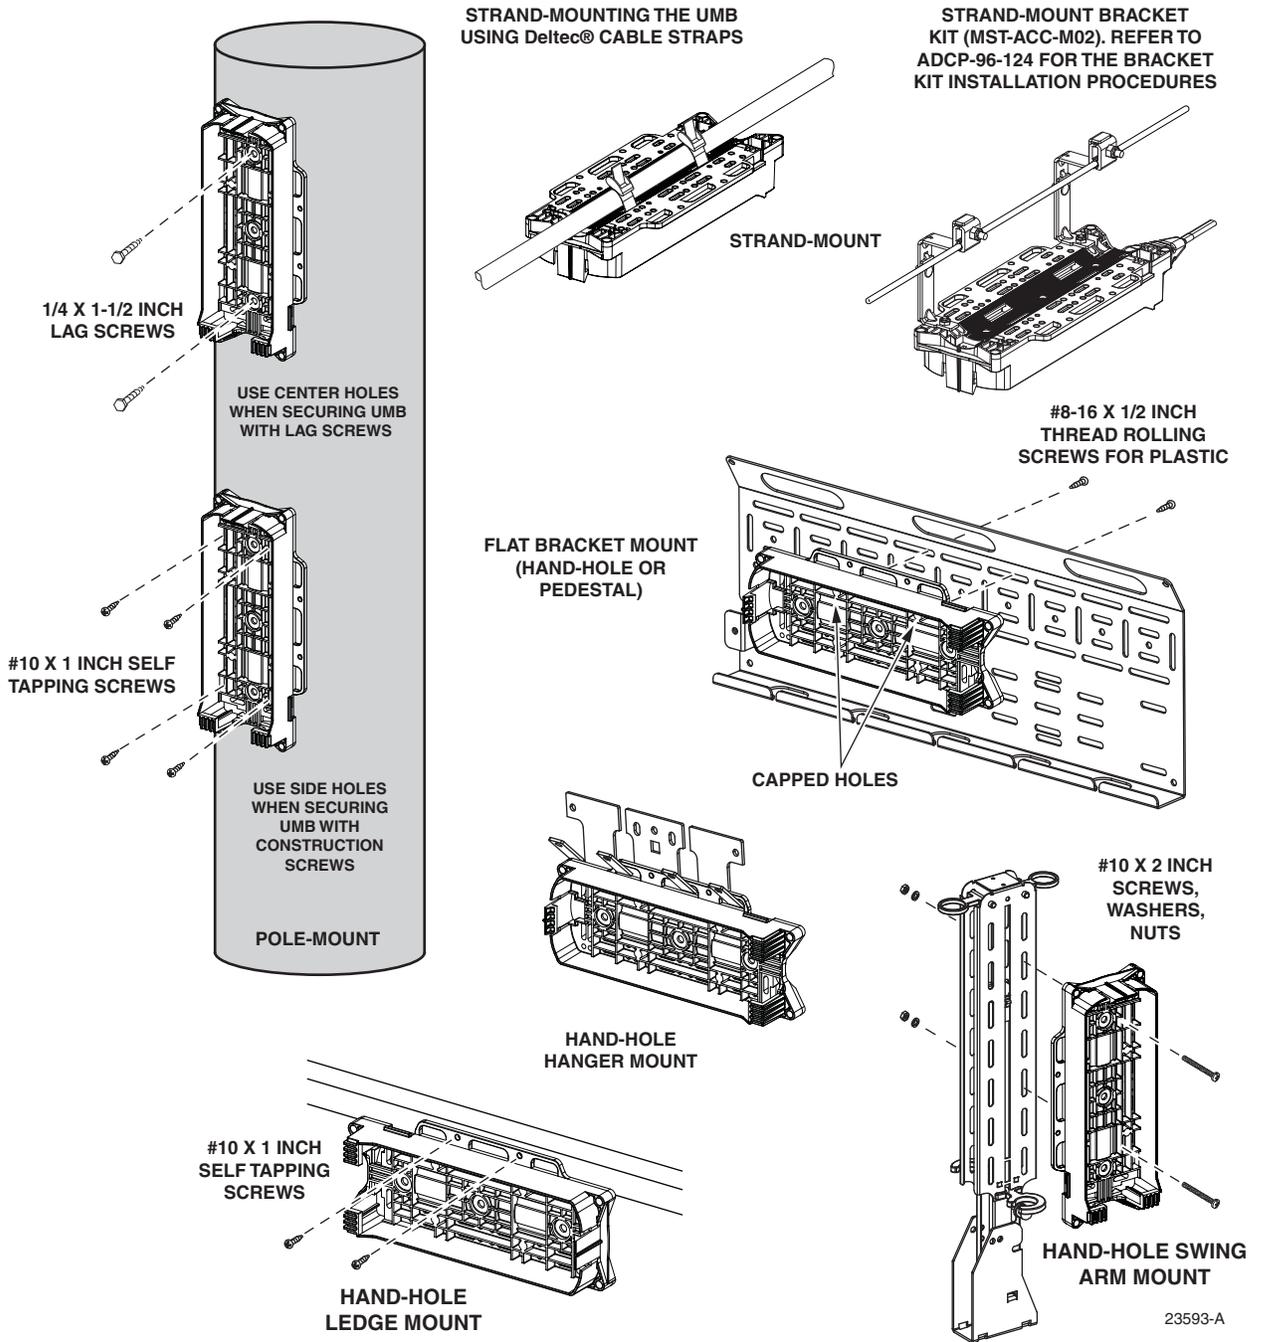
Typical Installation of a Universal Mounting Bracket (UMB)
